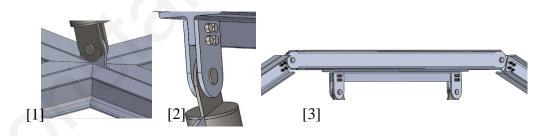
Connecting [1] telescope pipes to the bottom base, [2] telescope pipes to the top base of the horizontal bar, [3] horizontal bar
